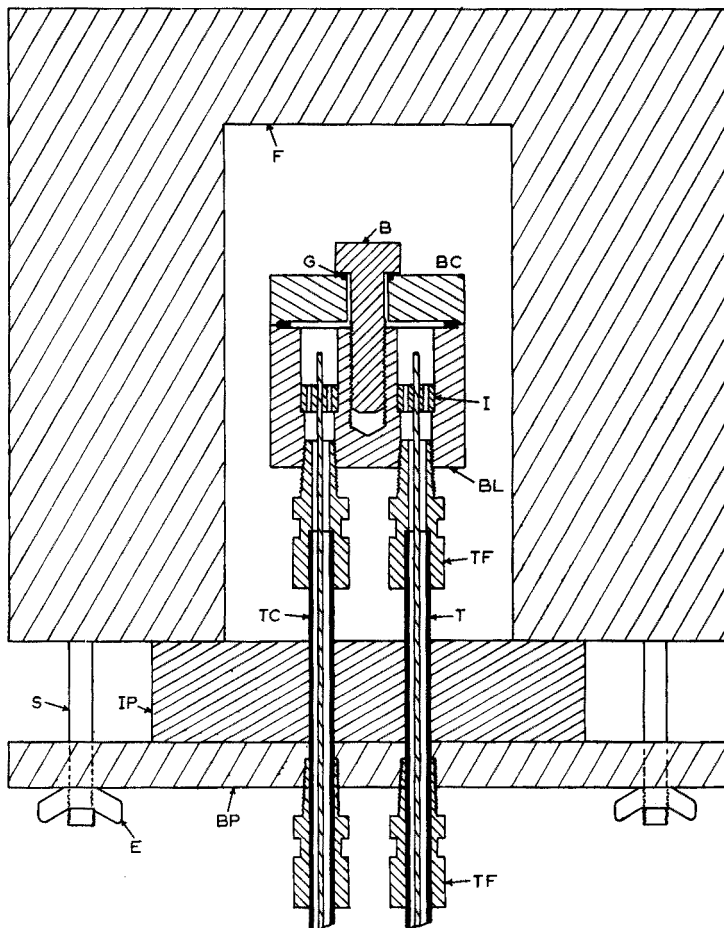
Differential thermal analysis sample holder-furnace assembly cross-section. F, furnace; B, bolt; G, gasket; BC, Inconel block cover; I, Inconel sample support piece; BL, Inconel block; TF, stainless steel tube fitting; T, Inconel tube; TC, sheathed thermocouple; S, stud; W, wing nut; IP, Transite insulating piece; BP, aluminum base plate.
